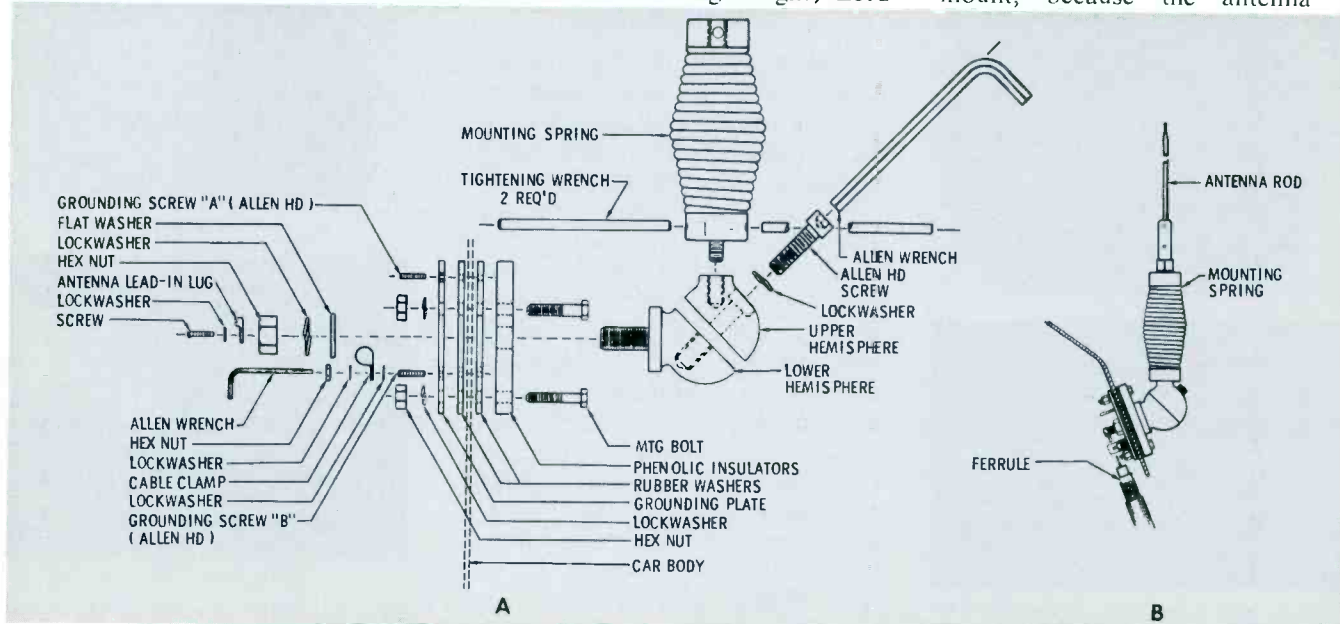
Exploded view of base assembly for ball-and-spring mobile mount.
